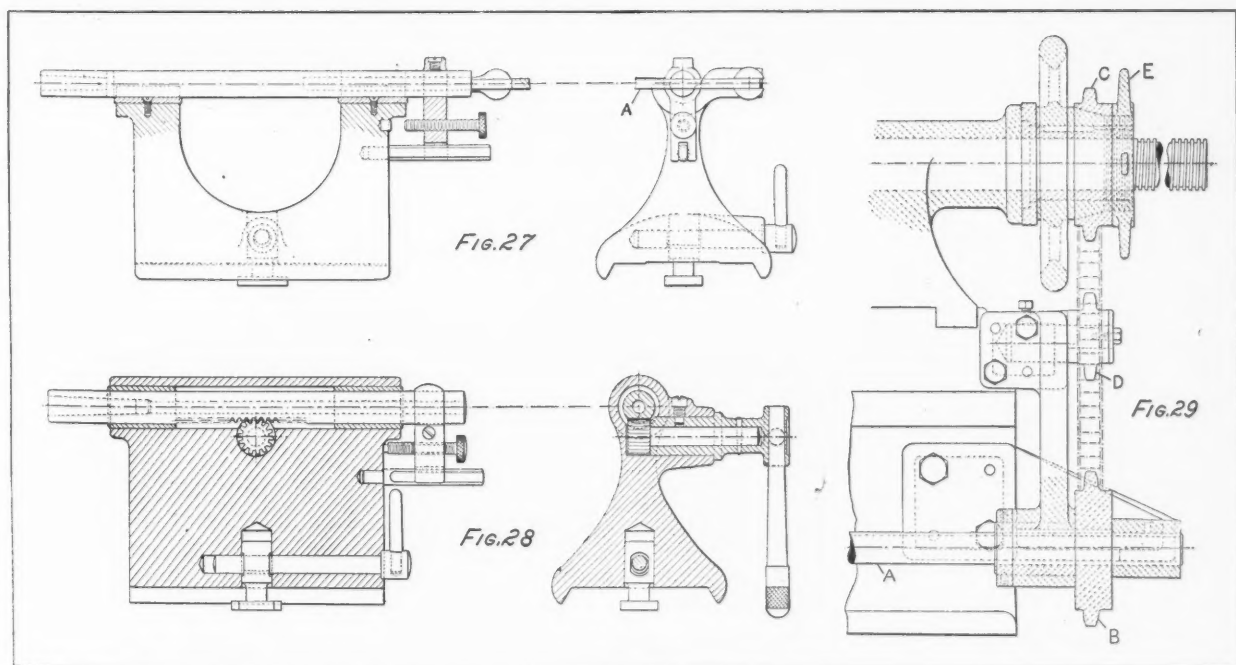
Half-open Type of Tailstock with Lever Feed. Fig. 28. Tailstock designed for Drilling Operations. Fig. 29. Sliding Head with Power Chain Feed
